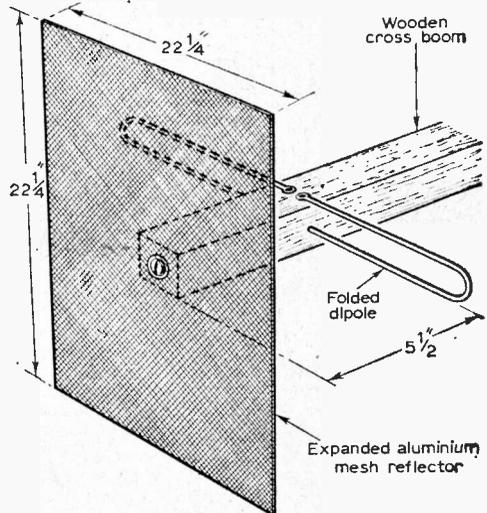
Expanded aluminium can make a useful reflector and is easily screwed on to the end of the cross boom as this drawing shows.
